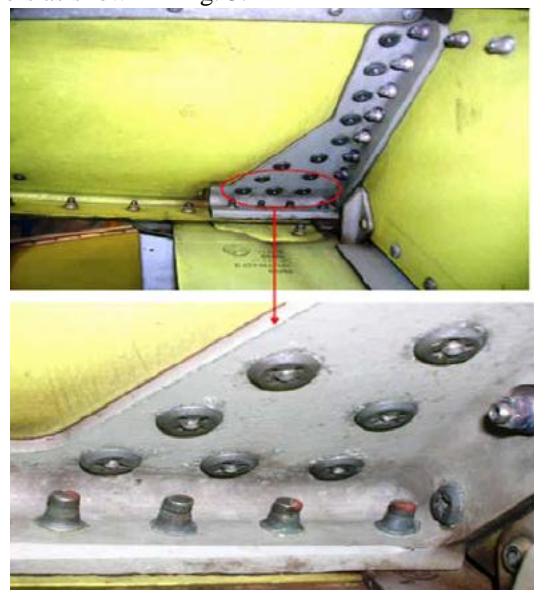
Galvanic corrosion around rivets in the engine area
